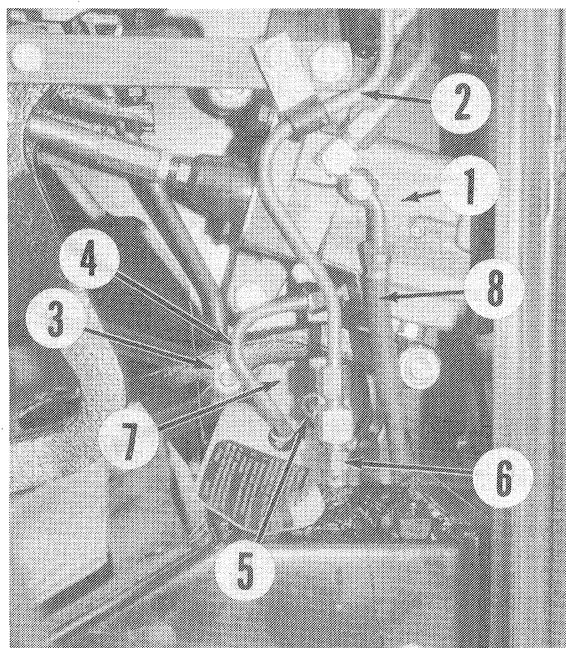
The brake accumulator is located in the steering console directly below the brake control valve.
